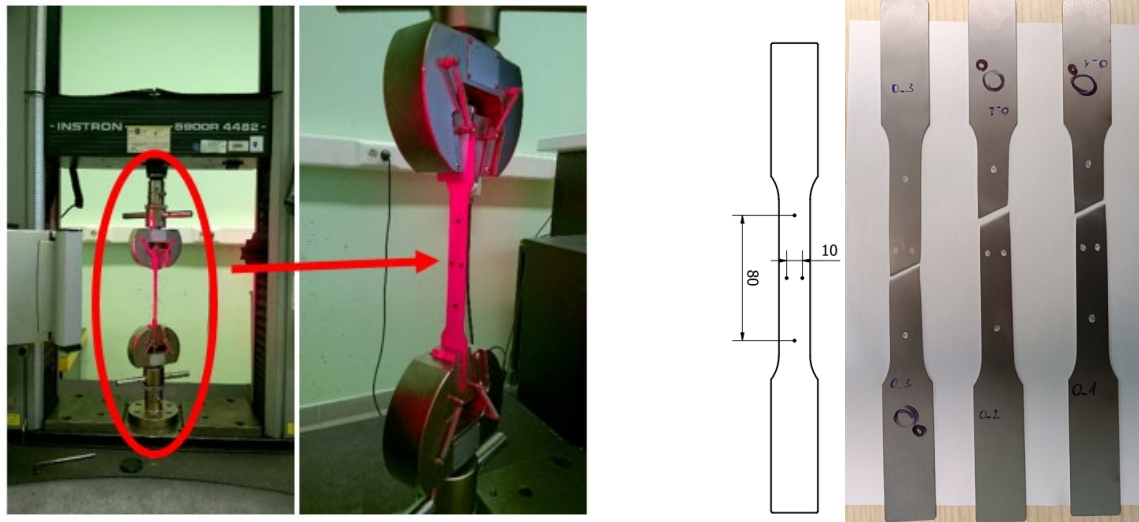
Tensile test equipment and specimens (dimensions are in mm).
